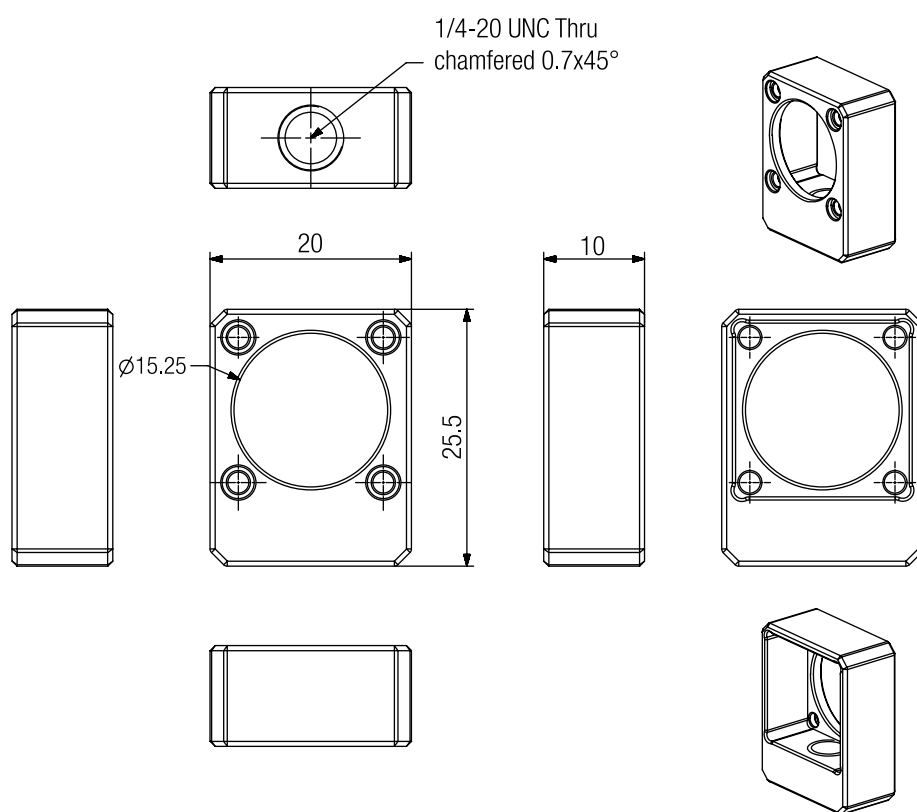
Dimensional drawing of ME-ADPT-MU-17x17-T
